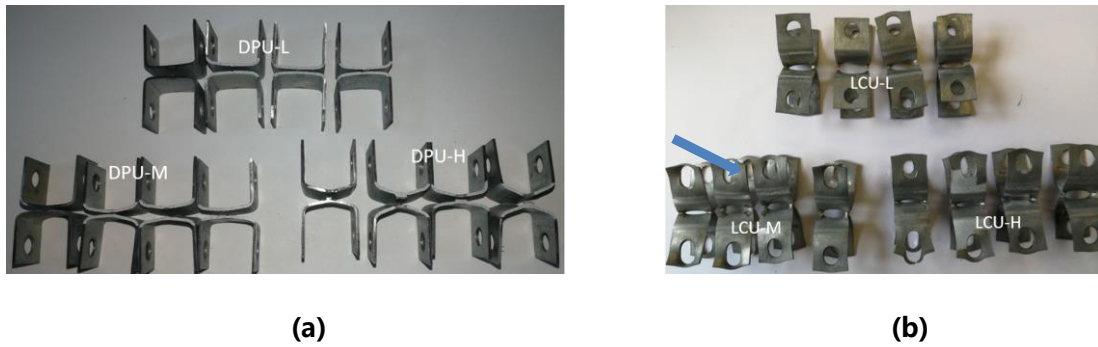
Failed U-shape samples in (a) DP1000 and (b) low carbon steel under three different welding currents.
